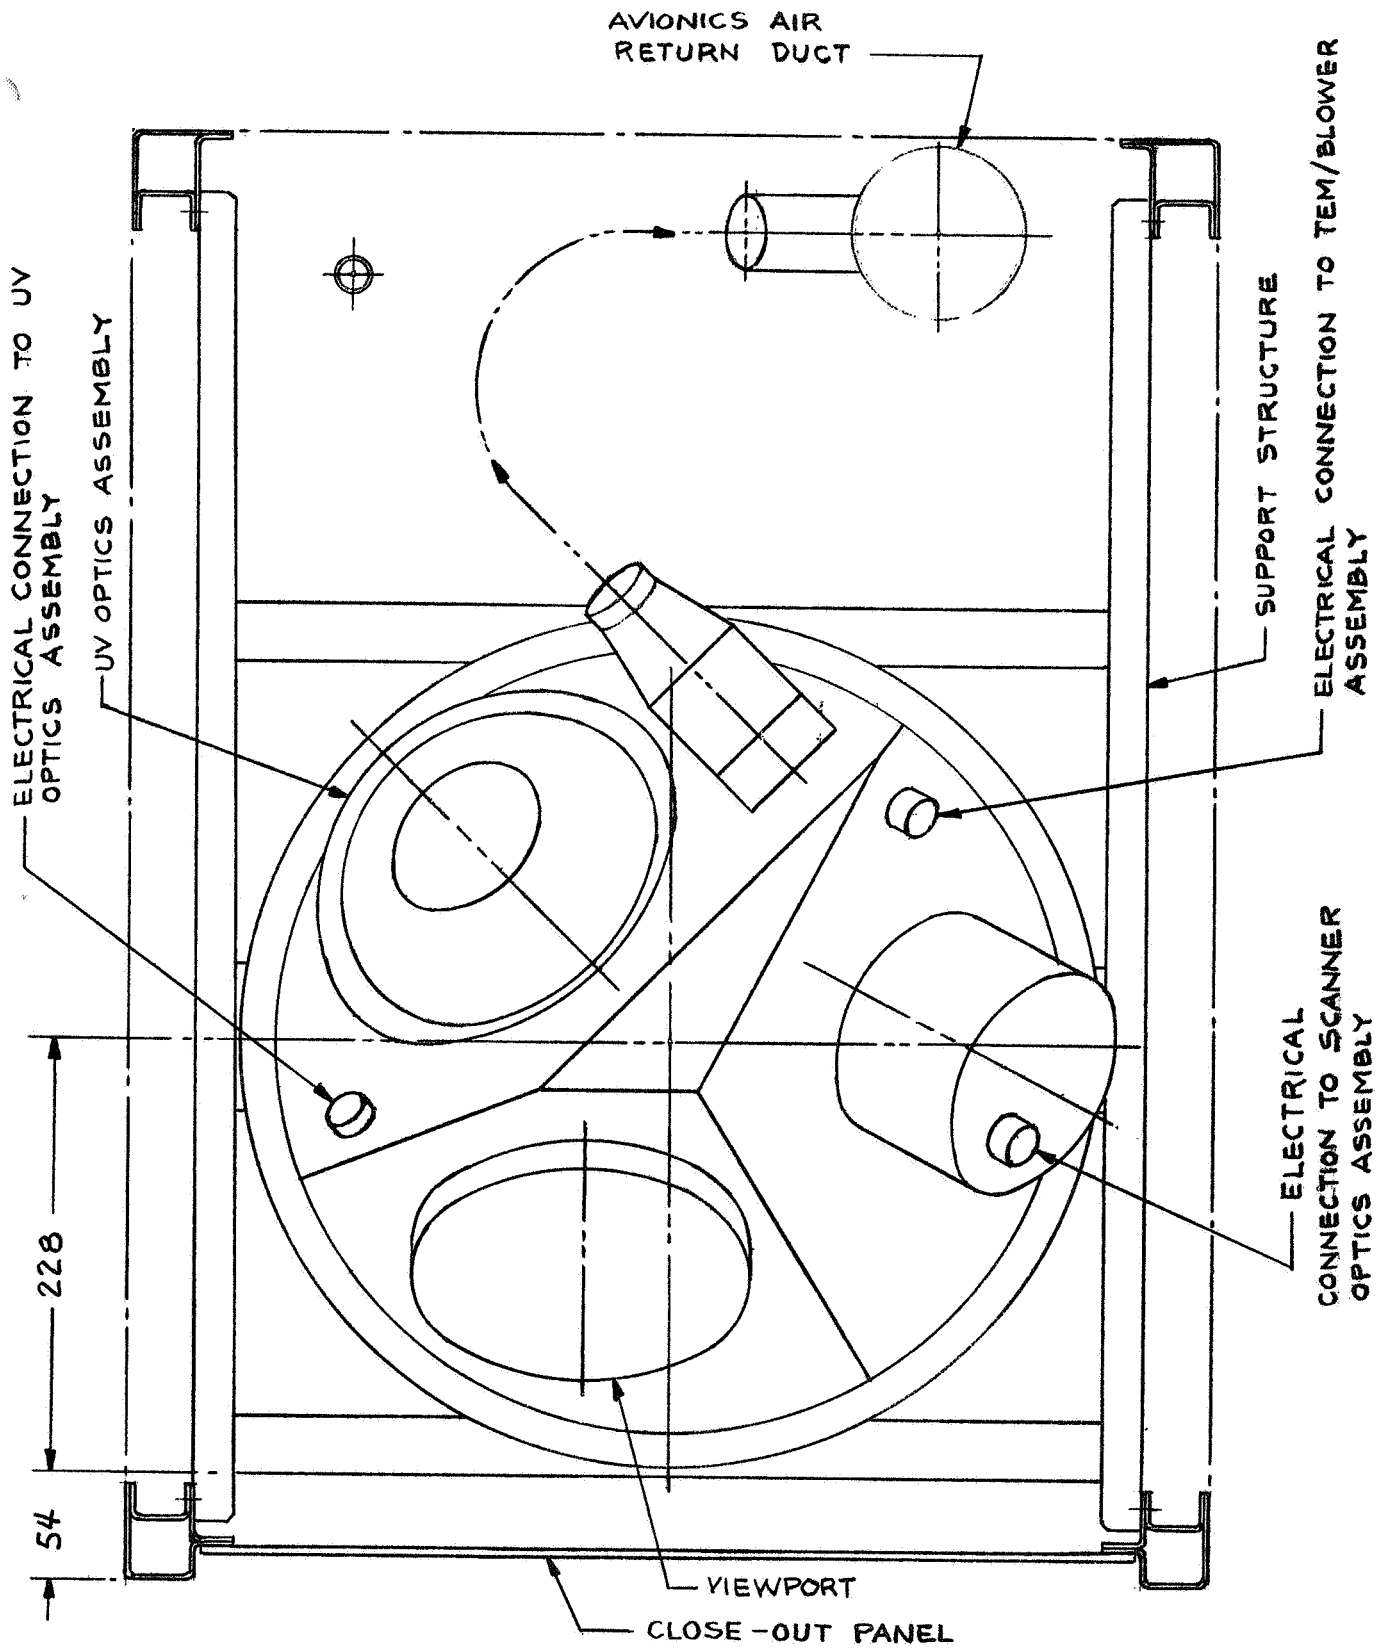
(b) SECTION A-A (MECHANICAL ASSEMBLY INSTALLATION;
